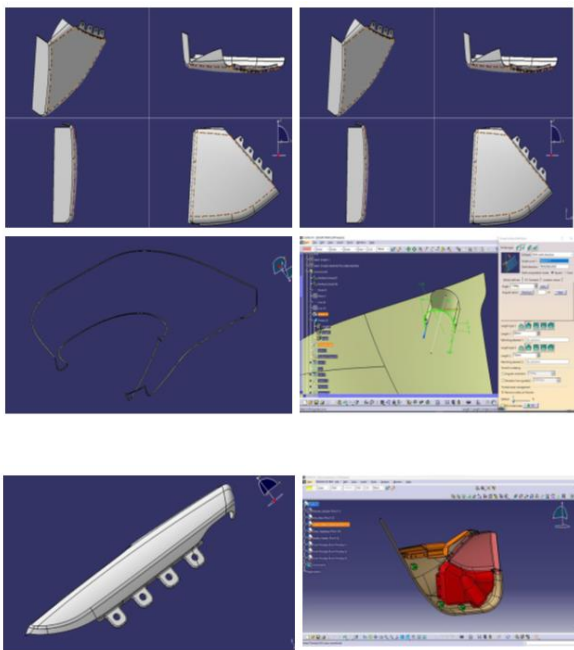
Detailed CATIA model of door trim showing key engineering features.
